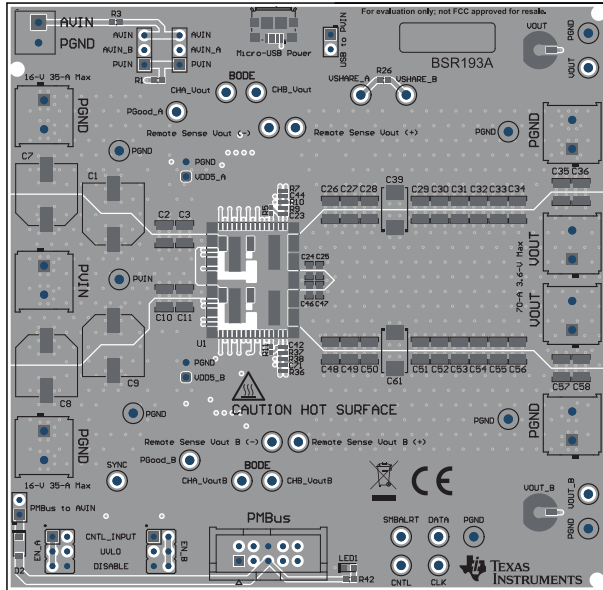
TPSM8D6C24EVM-2PH Top Side Component View (Top View)
